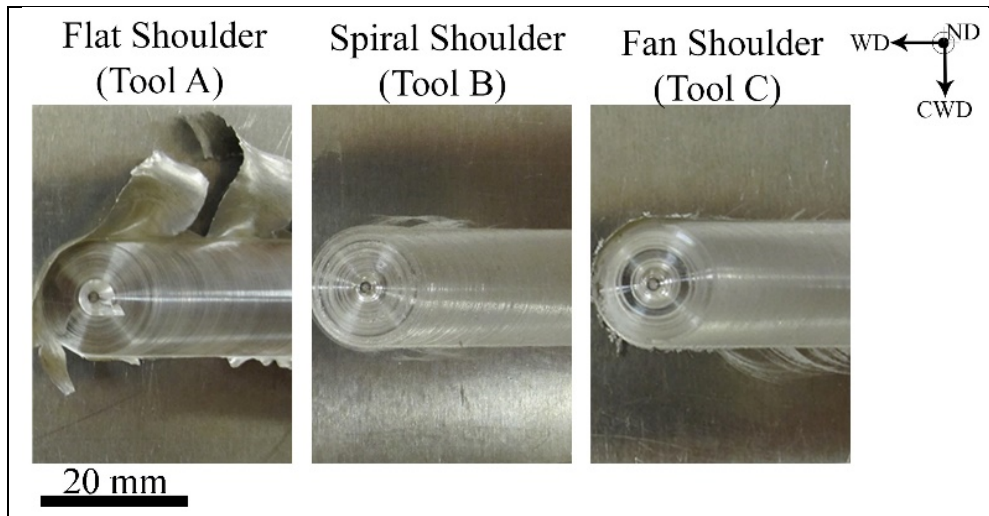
Surface morphology related to bead on plate of AA2024 material produced by tools A, B, and C. The spiral (tool B) and fan (tool C) shoulders prevent weld flashes.
